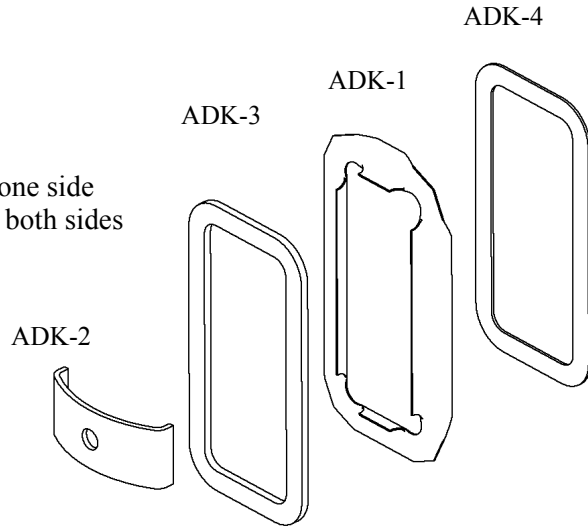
AD-K Kit Parts with AD Aerator and Mounting Hardware
